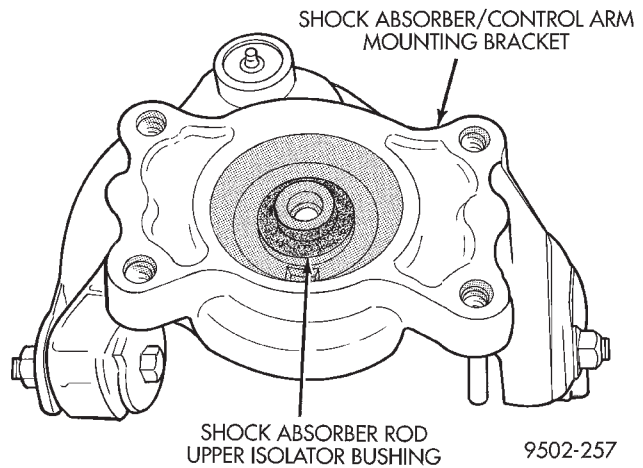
Shock Absorber Rod Upper Isolator Bushing
